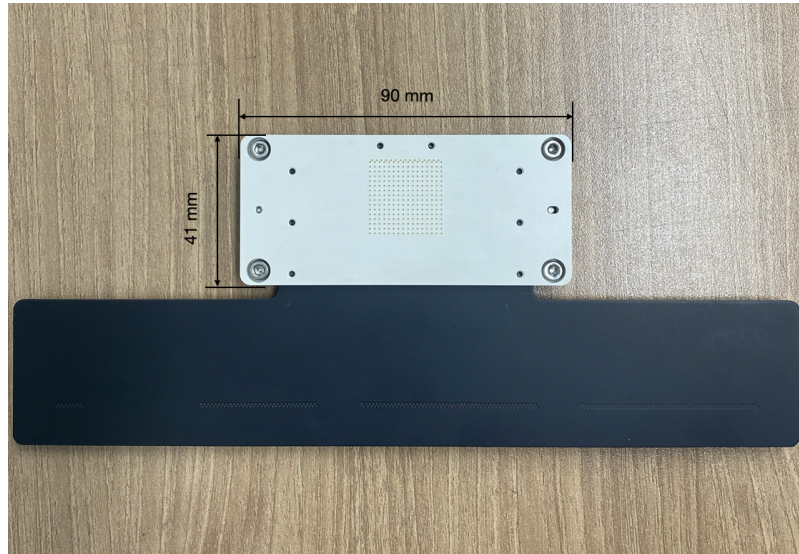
Fabricated probe card. The polymer head (90 mm × 41 mm) houses the central 16 × 16 pogo-pin array for pixel contact and 15 additional pogo pins for the guard ring pads. The elongated printed circuit board (PCB) section supports the FFC connectors used to route the pixel signals from the probe card to the switching board on the reverse side.
